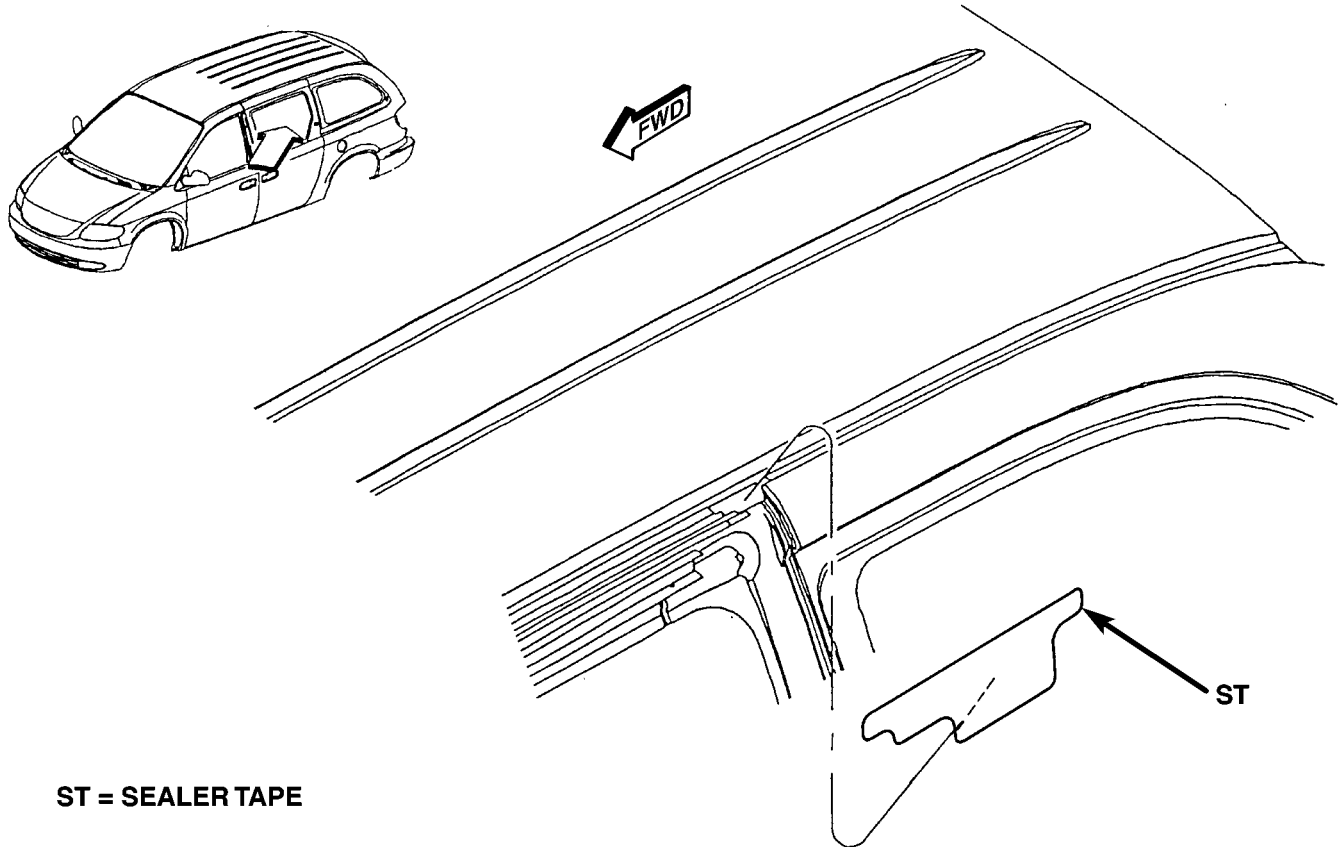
ROOF TOP JOINT & UPPER REAR SLIDING DOOR - LEFT AND RIGHT SIDES
